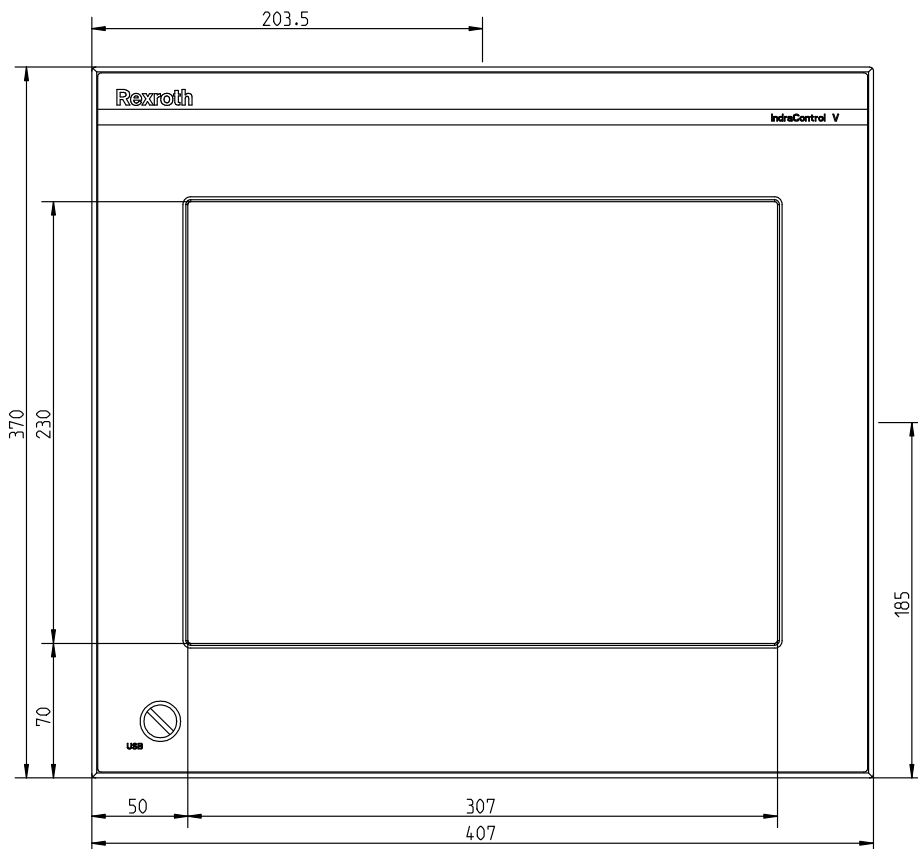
Dimensions: Front panel of the VDP 40.3BI devices
